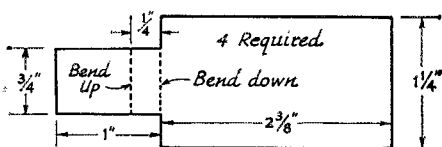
Details of one side of the detuning sleeve for the 1215-Mc. dipole. Four such pieces are cut from flashing copper and soldered together to form the sleeve shown in the photograph of the dipole assembly. A similar arrangement can be made from a single sheet of copper, and bent into either cylindrical or rectangular form, if desired.
